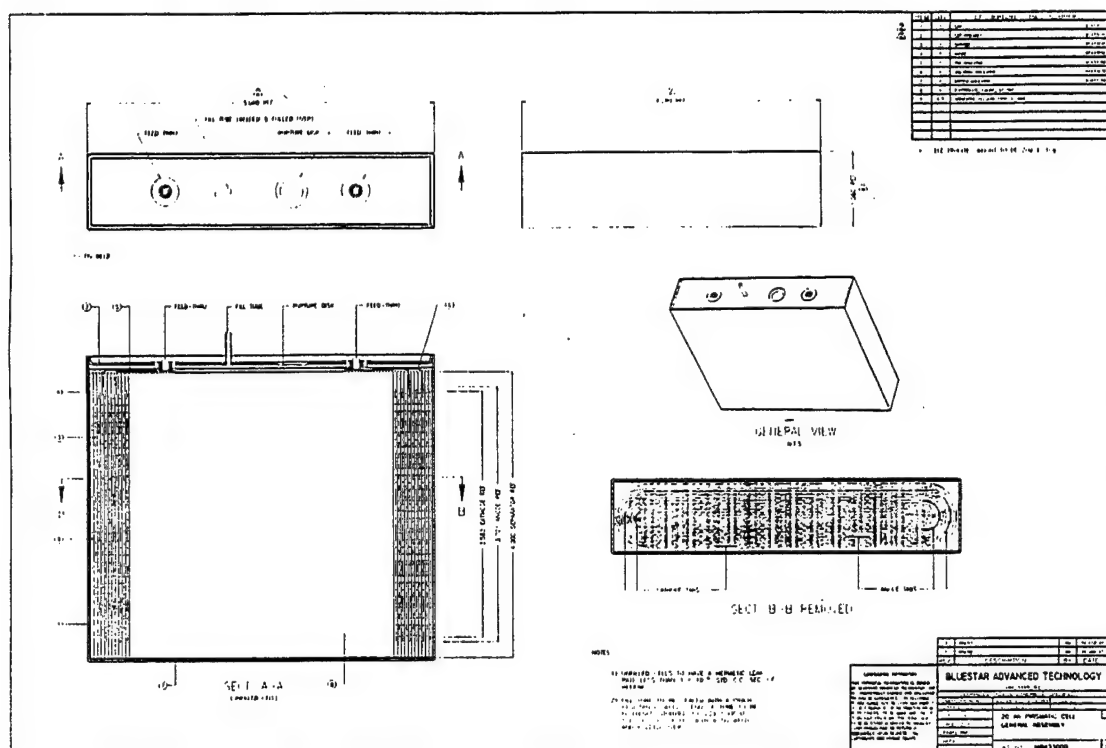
General assembly drawing of 20-Ah prismatic cell.
